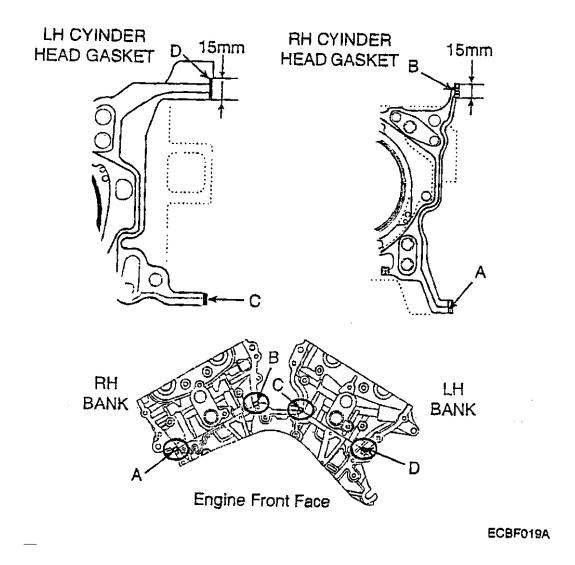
Applying Sealant On Cylinder Head Gaskets Courtesy of HYUNDAI MOTOR CO.
